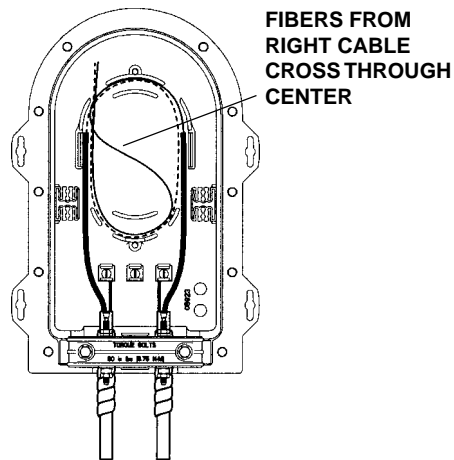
ROUTING FIBERS TO BE SPLICED IN STORAGE AREA
